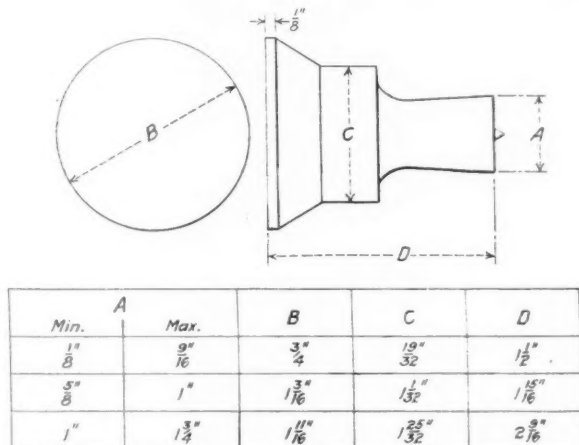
Only Three Sizes of Boiler Punch Heads Needed
